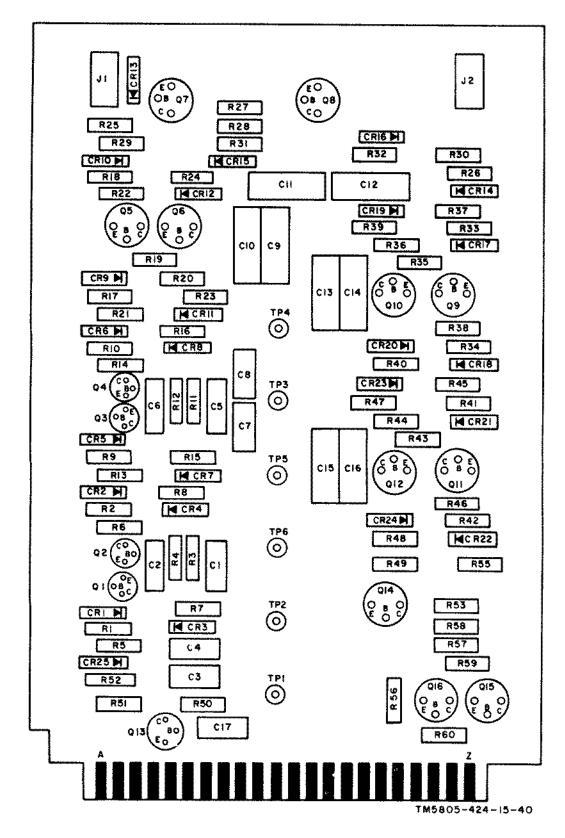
Printed-circuit card assembly A7 (PC 80034130), component location diagram.
